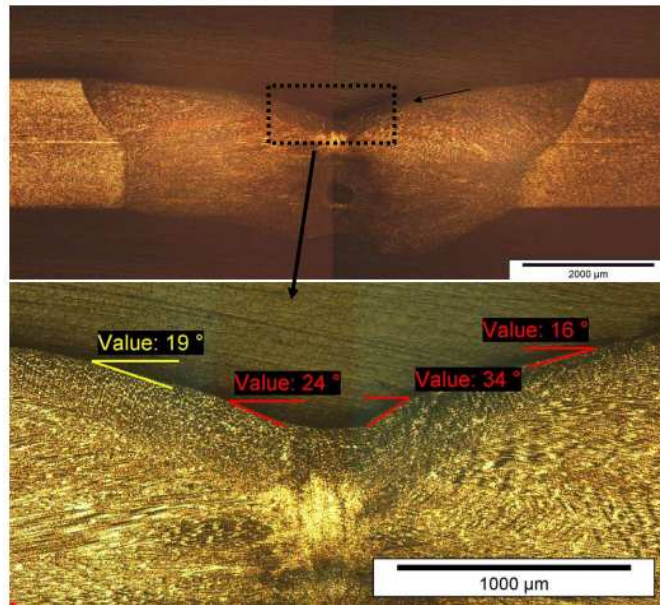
Cross section of the weld pool for a laser power of 2000W and a welding duration of 2s. (Top)The small black arrow shows the flow direction. (Bottom) Surface inclination angles in the centre of the weld pool (bottom).
